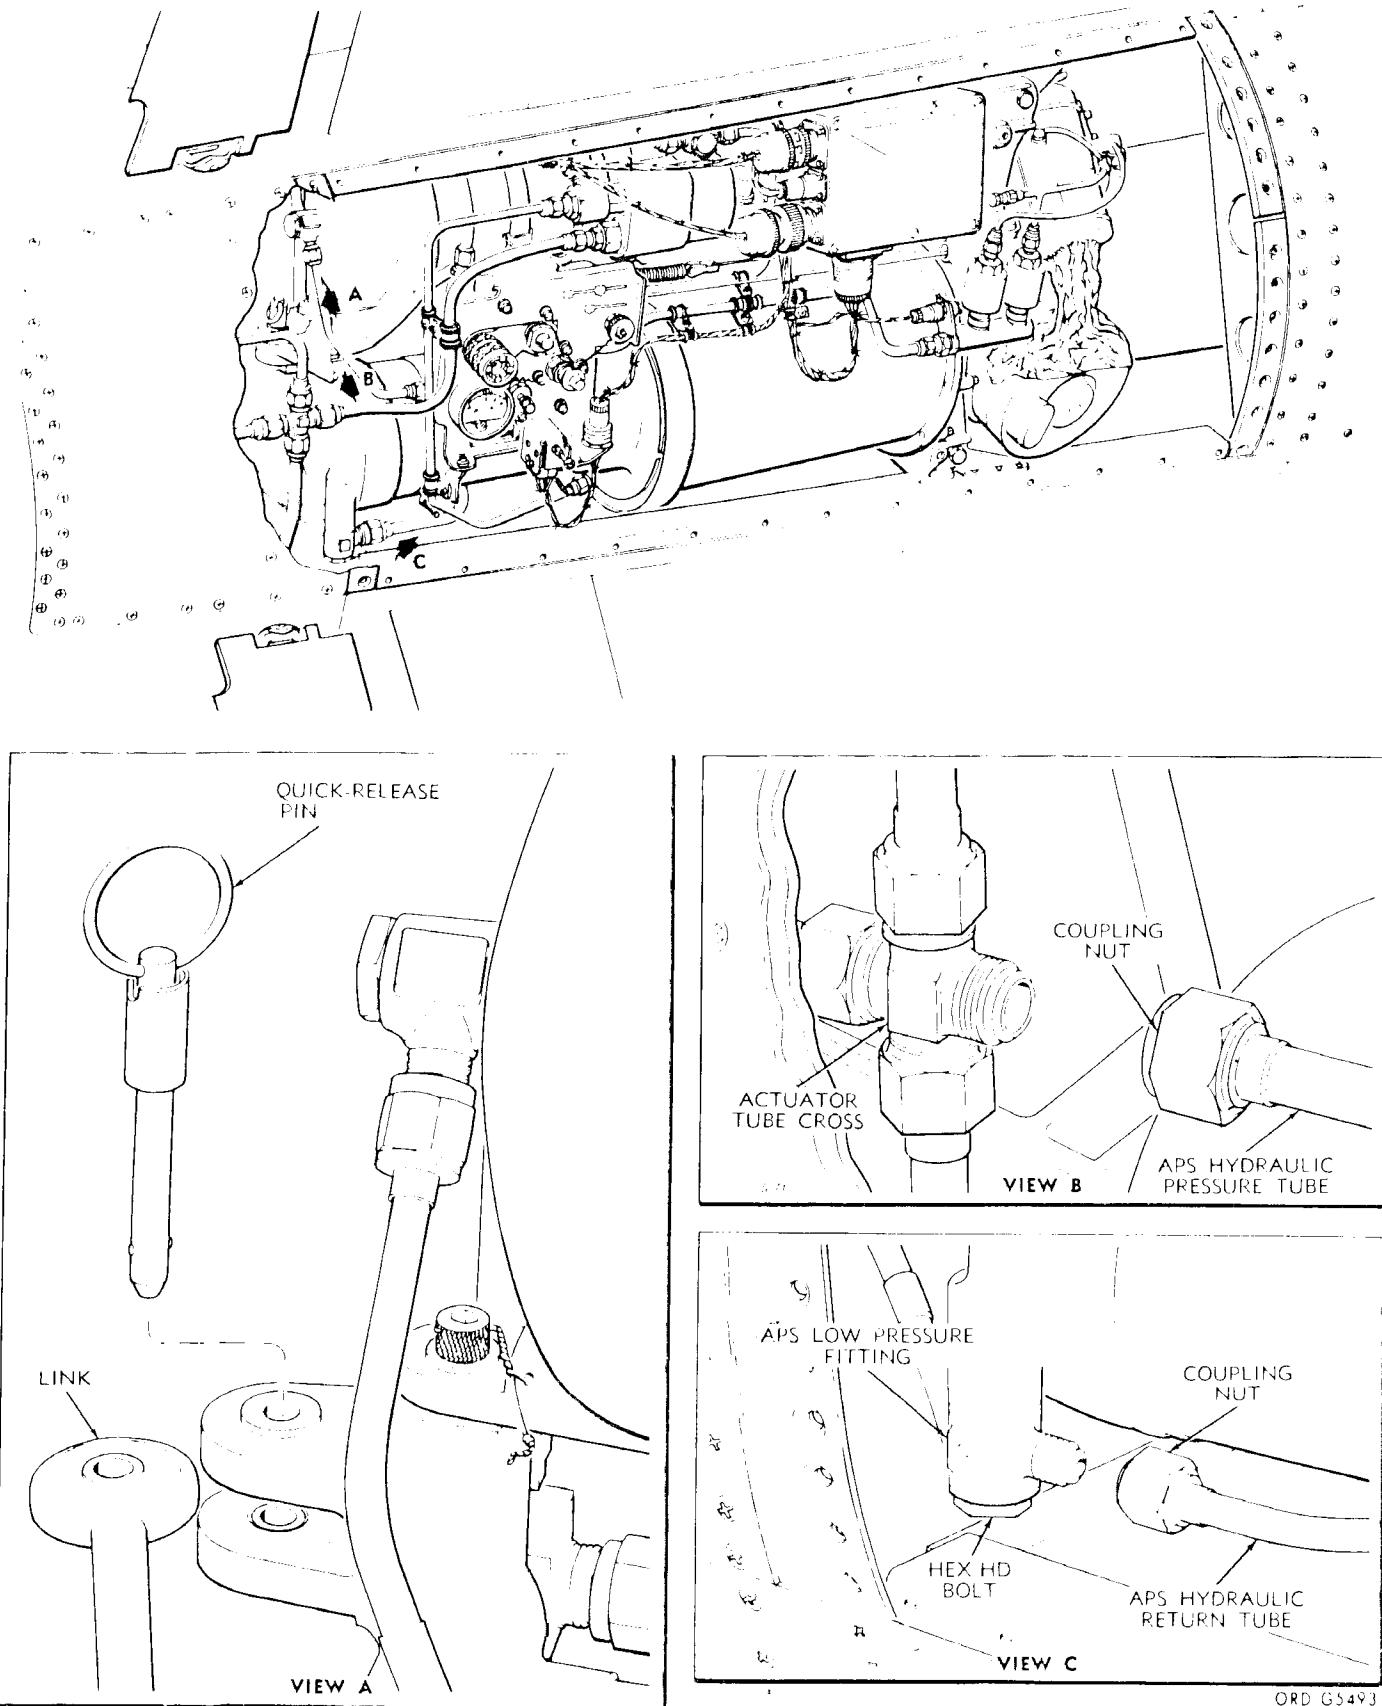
Removal and installation of the rear attachment for the accessory power supply.
